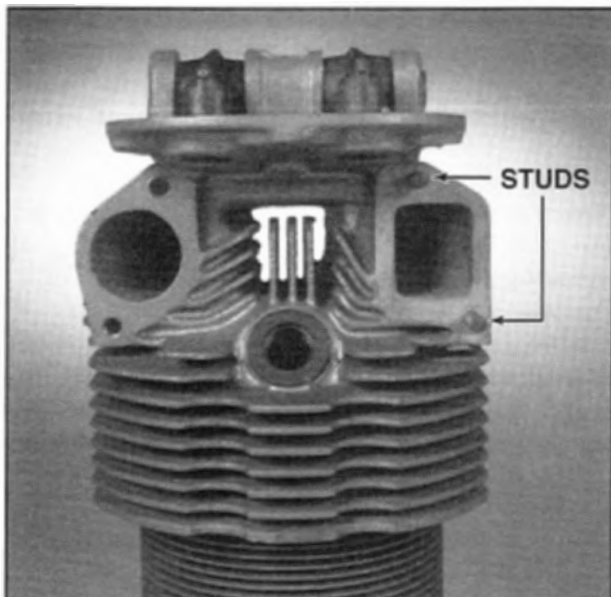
Threaded studs for attaching intake and exhaust manifolds typically remain in the cylinder.
